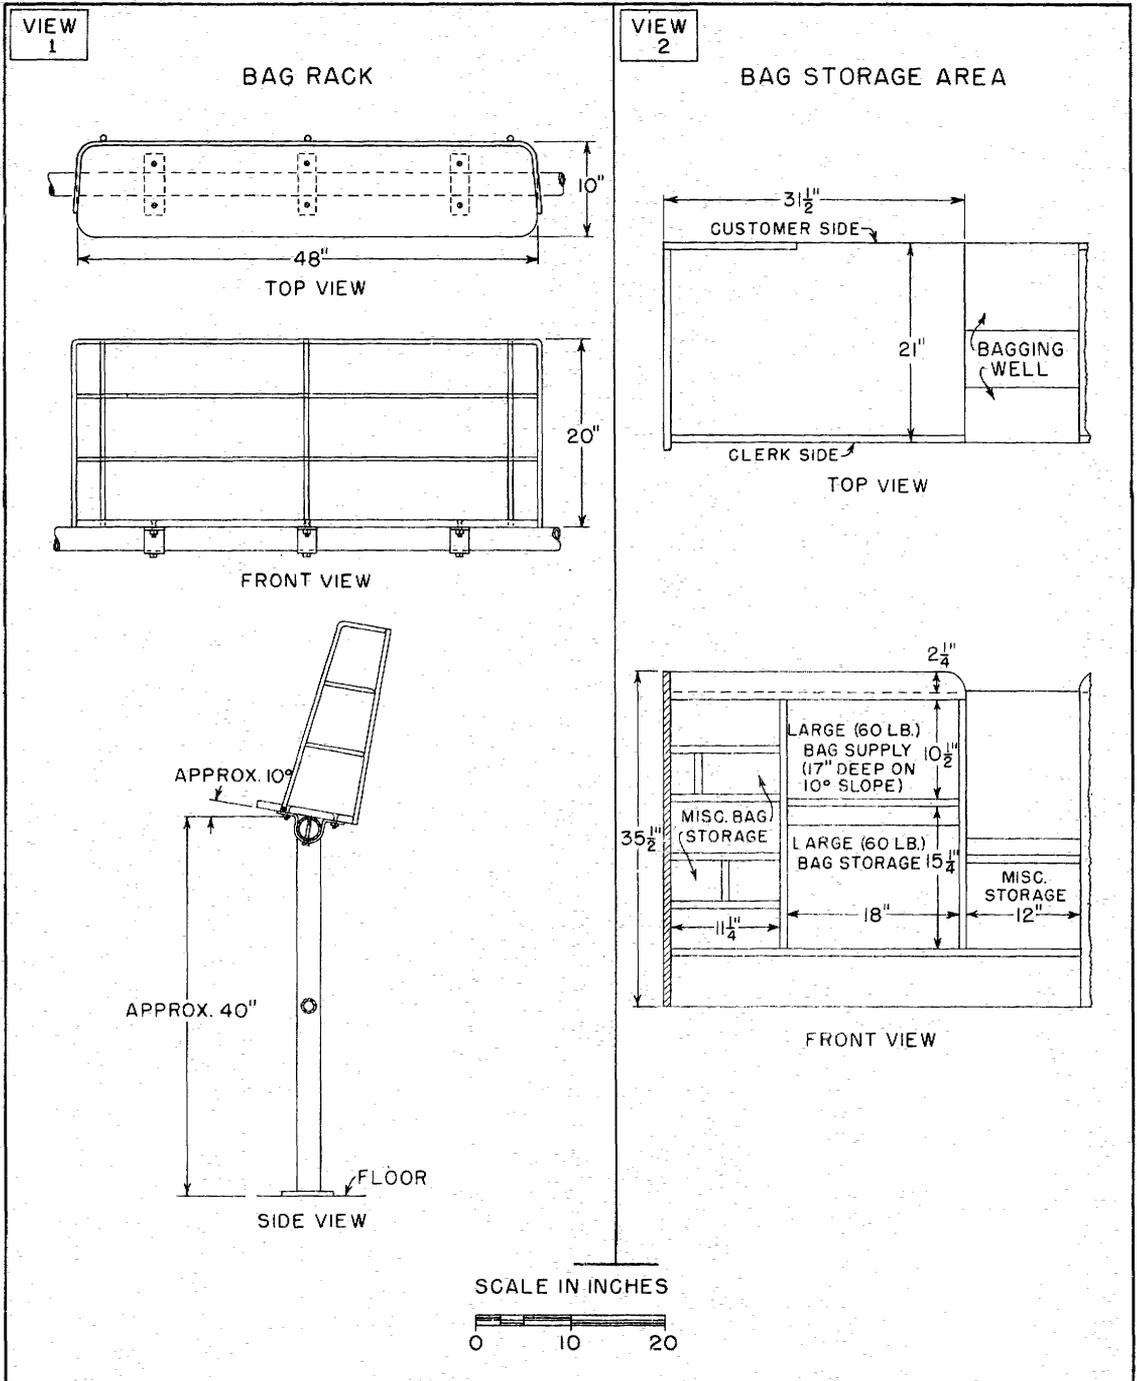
Detailed view of bag rack and bag storage area on Redi-chek conveyor check-out counter.
